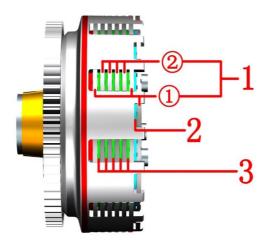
RIGHT CRANKCASE		Clutch assembly-1	CHK
